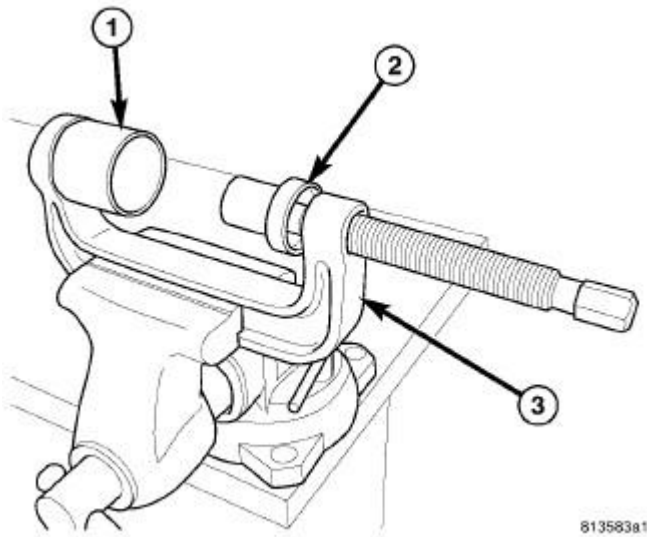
TOOLS ASSEMBLED FOR BALL JOINT REMOVAL
